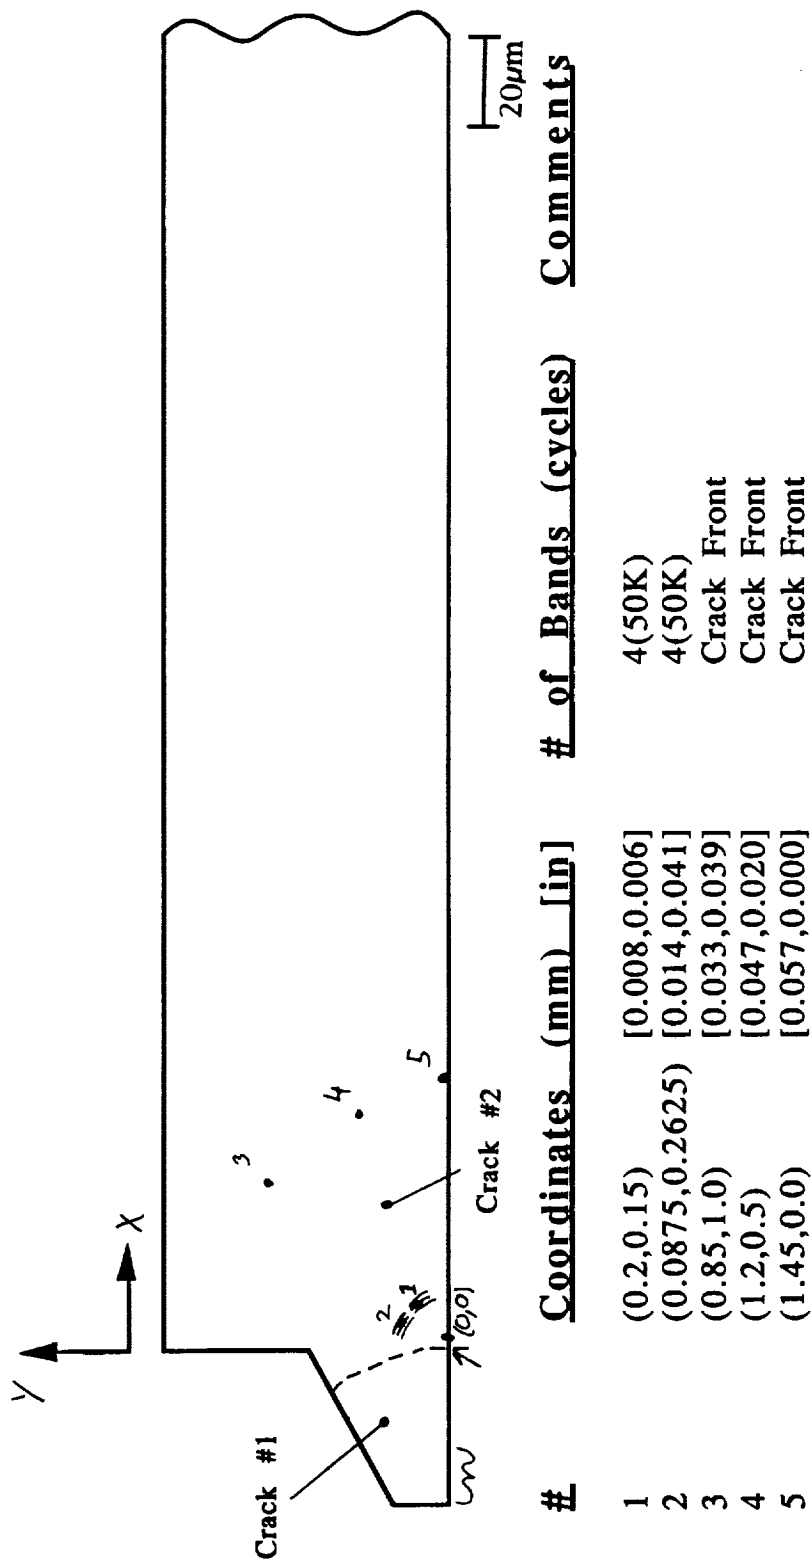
Rivet hole schematic: Upper rivet row, hole number 3J1, fatigue crack growth is in the forward direction.
